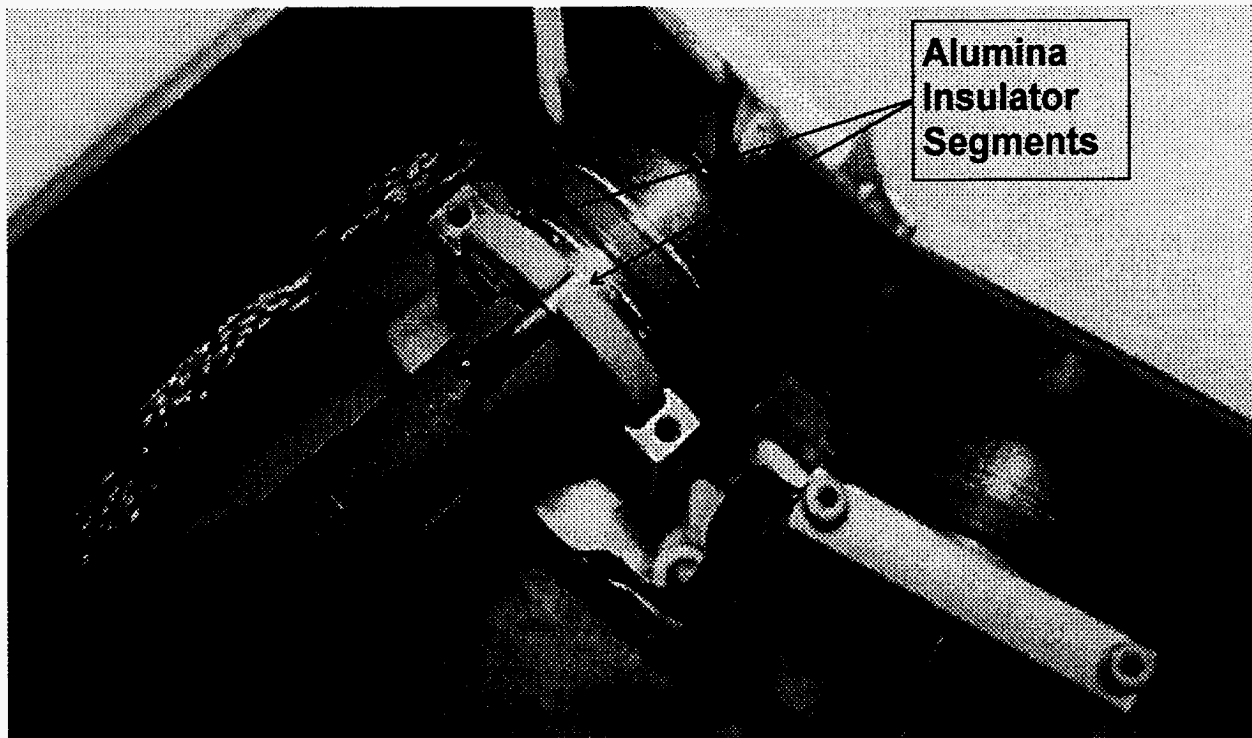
Diode Mounting Assembly Ceramic Insulator Segments.
